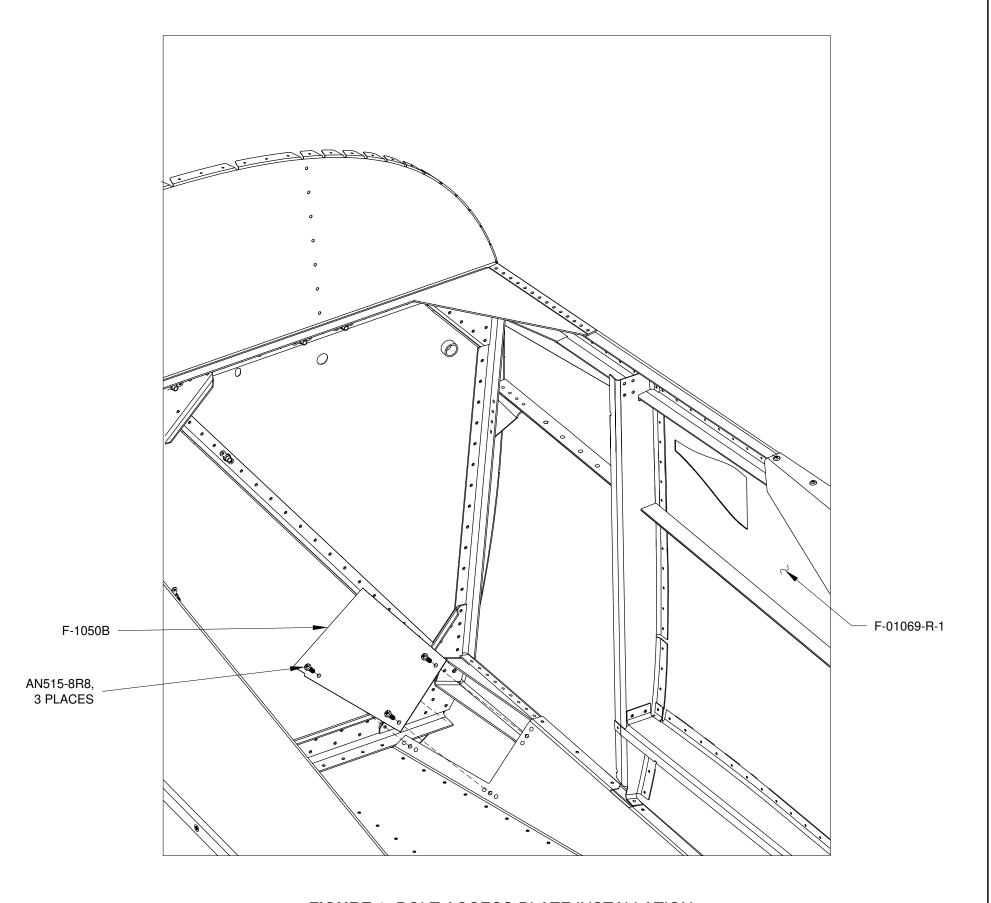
BOLT ACCESS PLATE INSTALLATION
